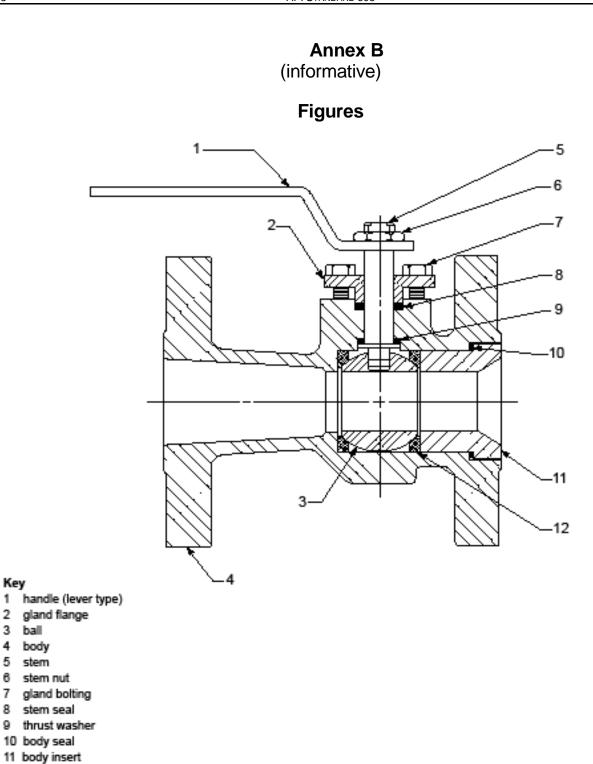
Typical Floating Ball Valve Components (One-piece Body/ Unibody Illustrated)—Nomenclature
